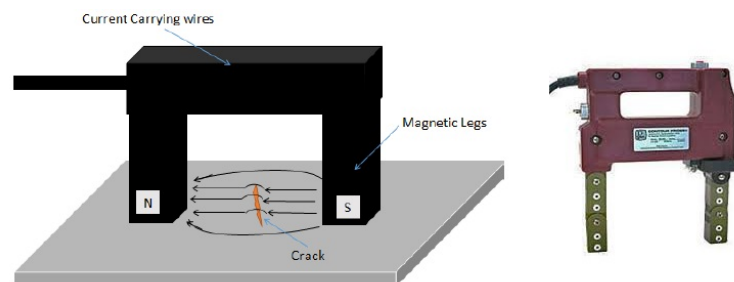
Principle of magnetic particle inspection technique.
